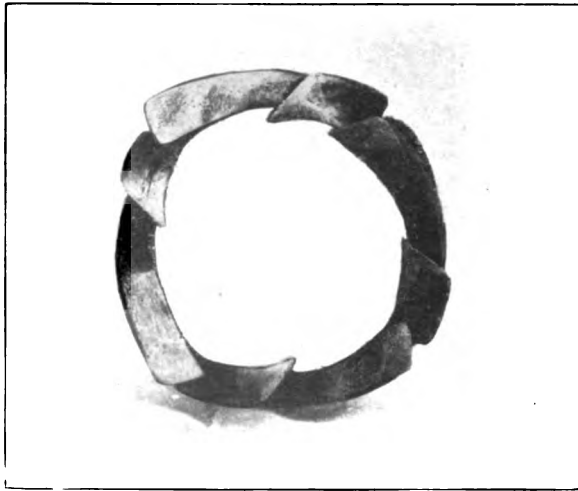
End View of the Cutting Cylinder Showing the Position of Teeth.
